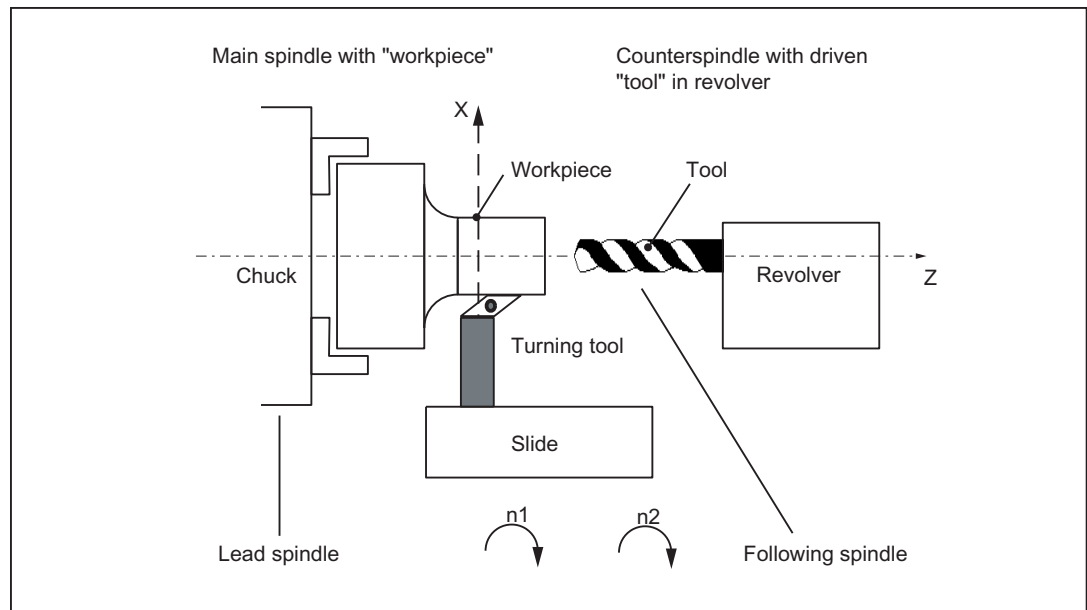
Application on a single-slide turning machine with turret about Z axis
